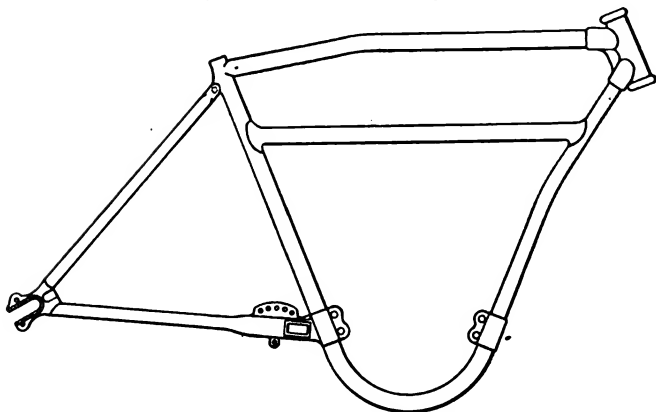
Loop Frame Showing Lugs for Motor Attachment
